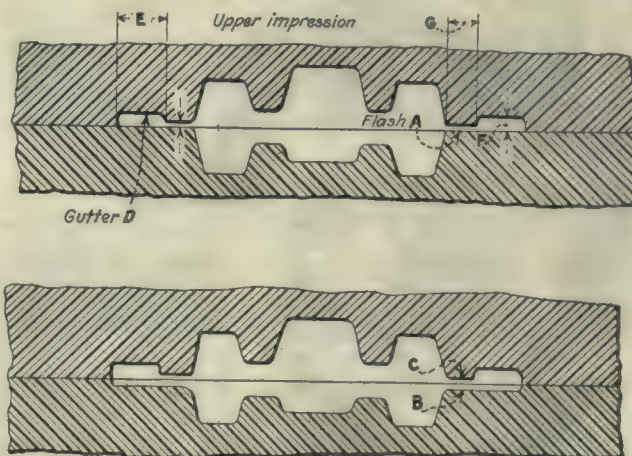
SECTIONAL VIEW OF UPPER AND LOWER DIES
